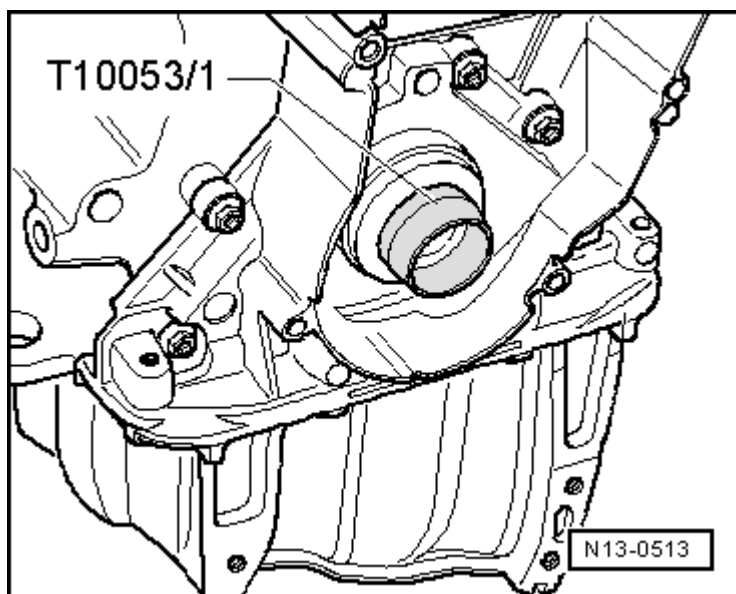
Identifying Guide Sleeve From Assembly Tool T10053 & Crankshaft Journal
